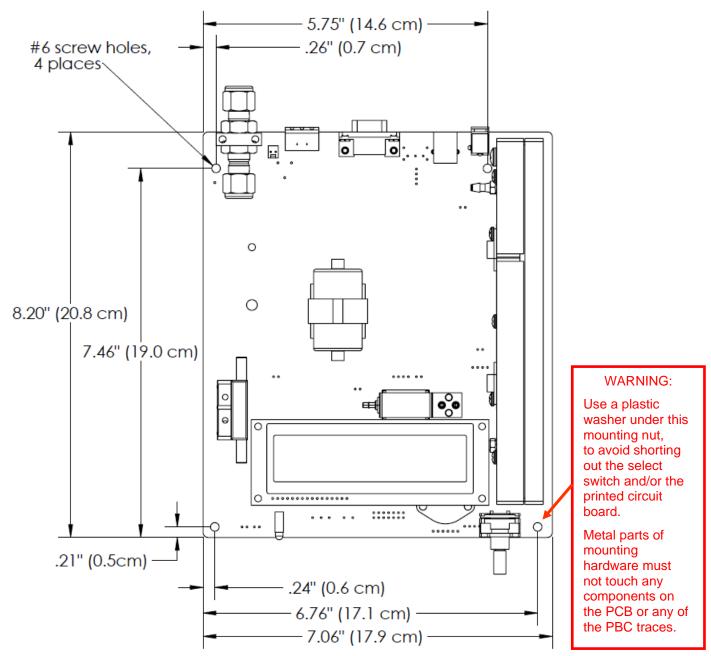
OEM Dimensions and Mounting Holes (Top View).
